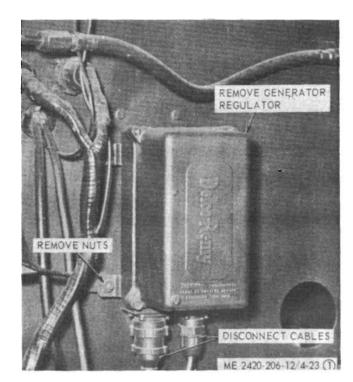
Generator regulator, testing, removal and installation (sheet 1 of 2).
